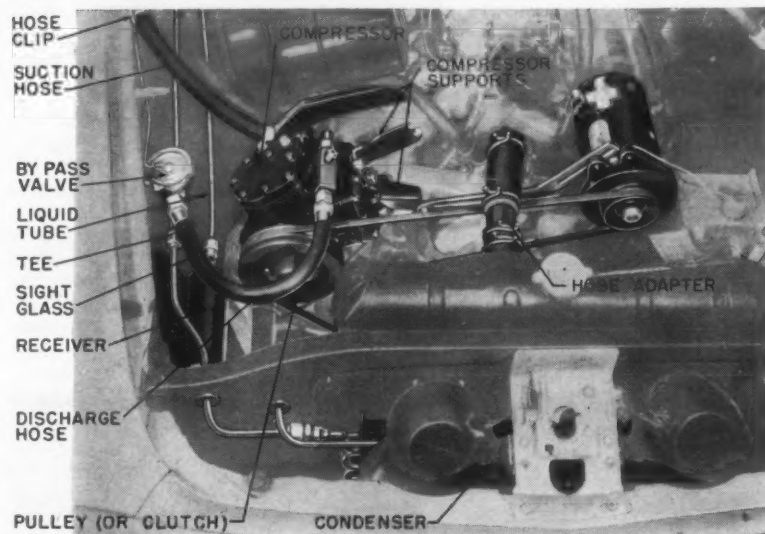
Early 1957 Airtemp conditioner employs a by-pass valve as shown. Magnetic clutch is an optional accessory.
